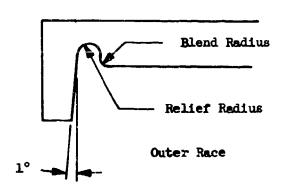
ROLLER BEARING RACEWAY MODIFICATION
